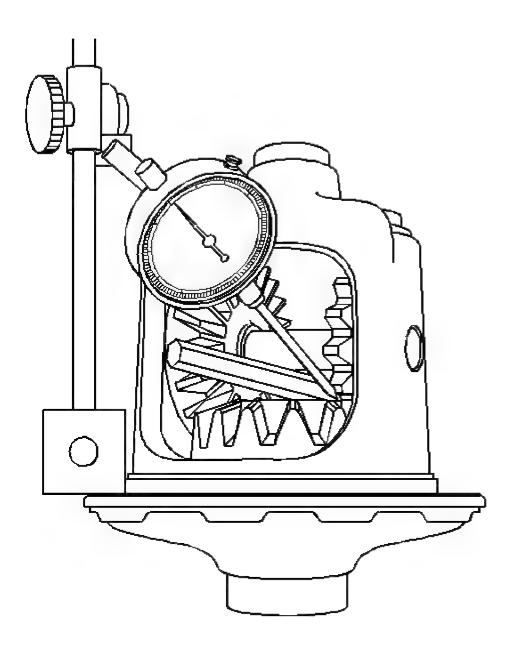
Measuring Backlash Of Pinion Gear & Side Gear Courtesy of GENERAL MOTORS CORP.
